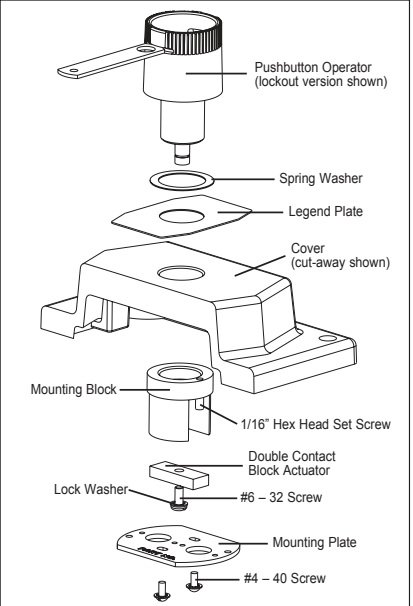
Assembly of Single Pushbutton Operator with Two Contact Blocks
